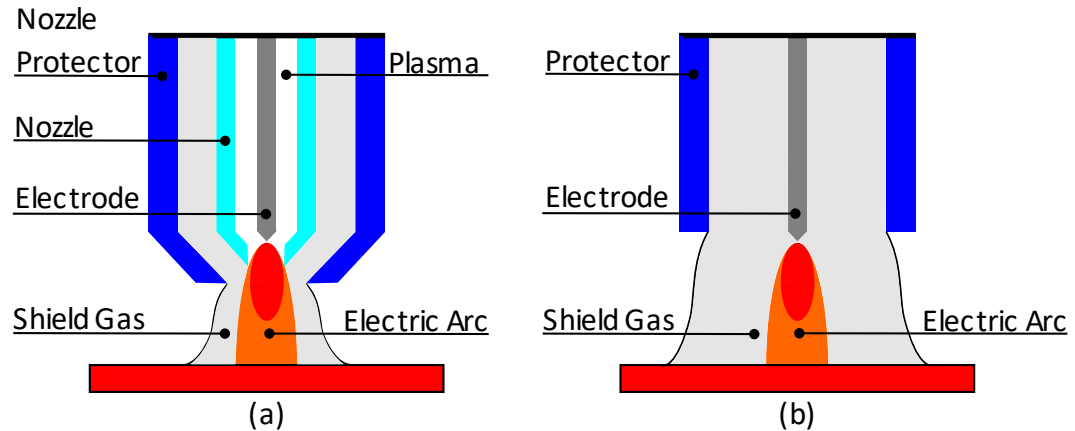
PAW and GTAW weld torch comparison. (a) PAW weld torch, (b) GTAW weld torch
